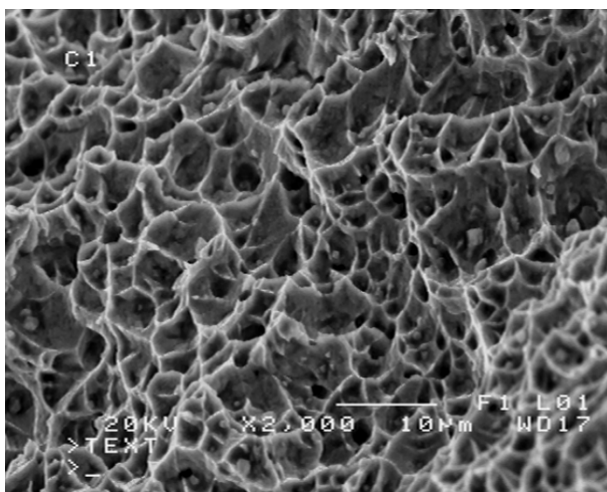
Ductile fracture image of the weld, heat input heat input HI = 3.0 kJ/mm
